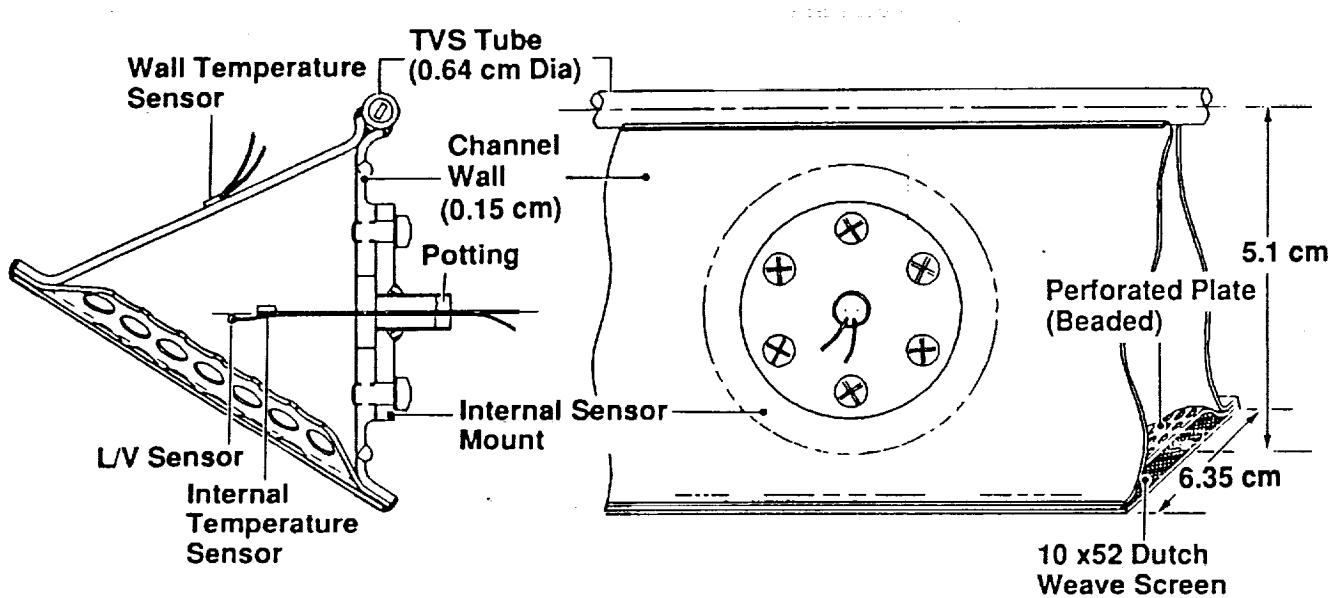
Depot LAD channel design and L/V sensor mount.
